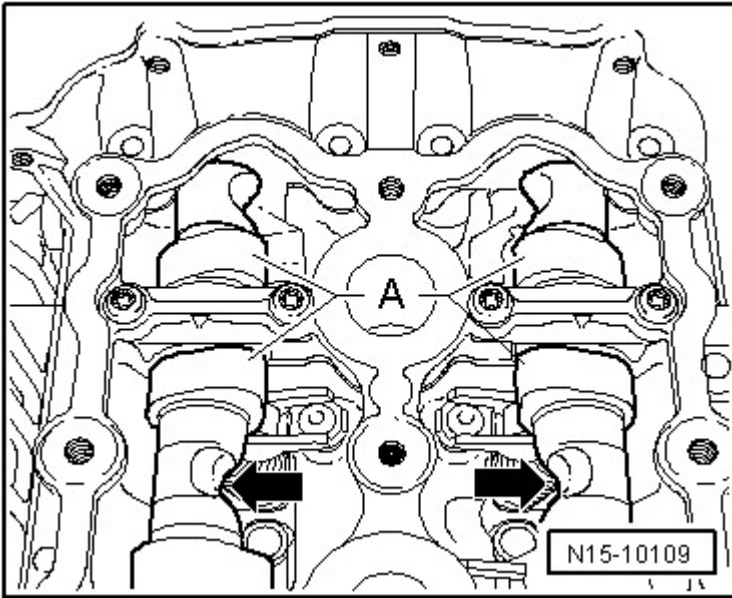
Bringing Marking On Camshaft Gear To Alignment With Marking On Toothed Belt Guard
